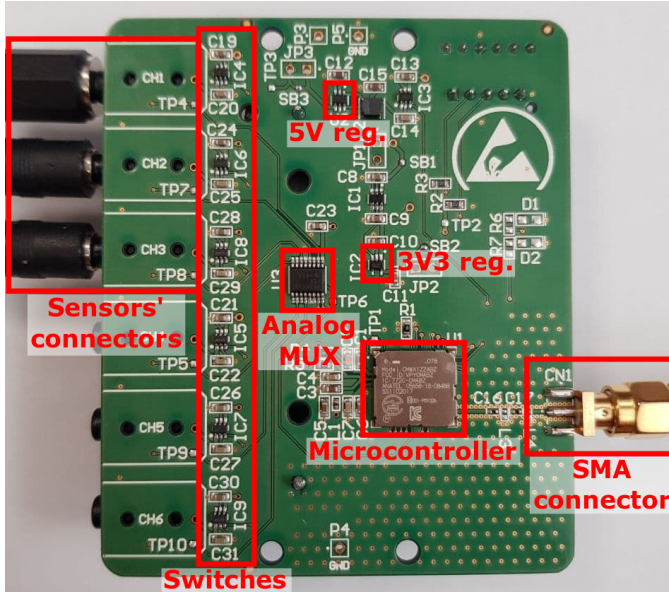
Top view of designed Printed Circuit Board (PCB).
